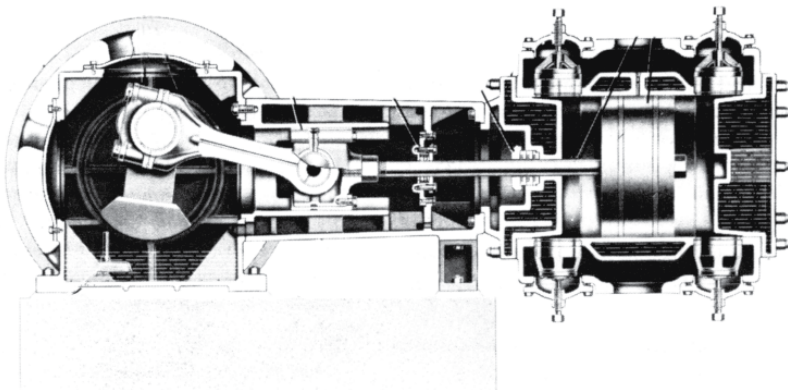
Single Cylinder, Single Throw, Horizontal, Double-Acting Compressor
